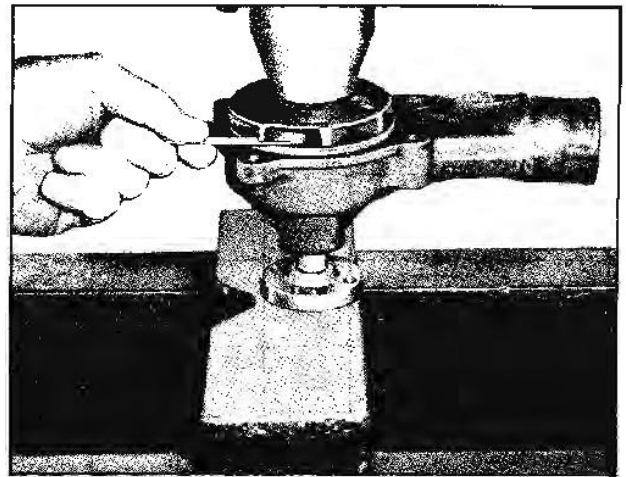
A-26 Checking Impeller to Pump Body Clearance
